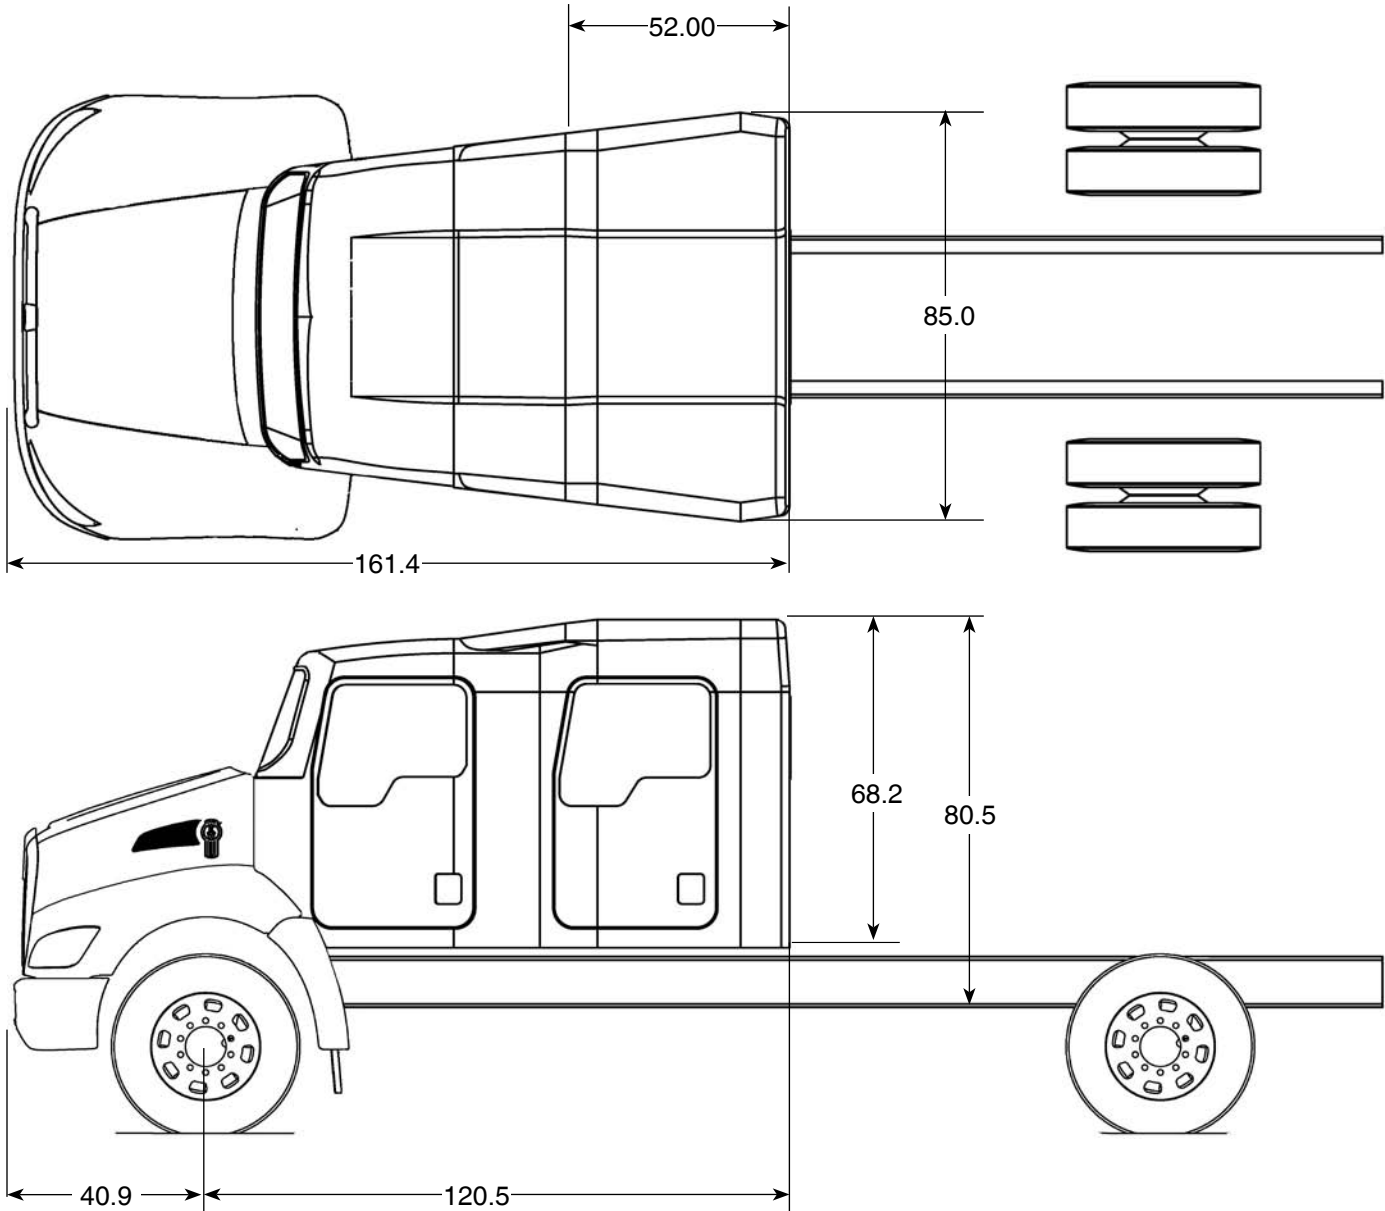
T170/T270/T370 Crewcab Conversion, Overall Dimensions [inches (mm)]
